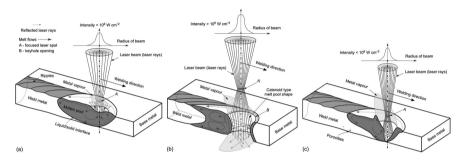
Laser beam welding operation types: (a) heat conduction mode; (b) keyhole mode with defocused laser; and (c) keyhole laser welding with highly focused energy.
